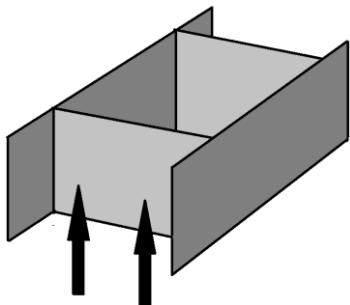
, PLACE OF GEAR RACKS ON INNER BOX BEFORE REDESIGN
